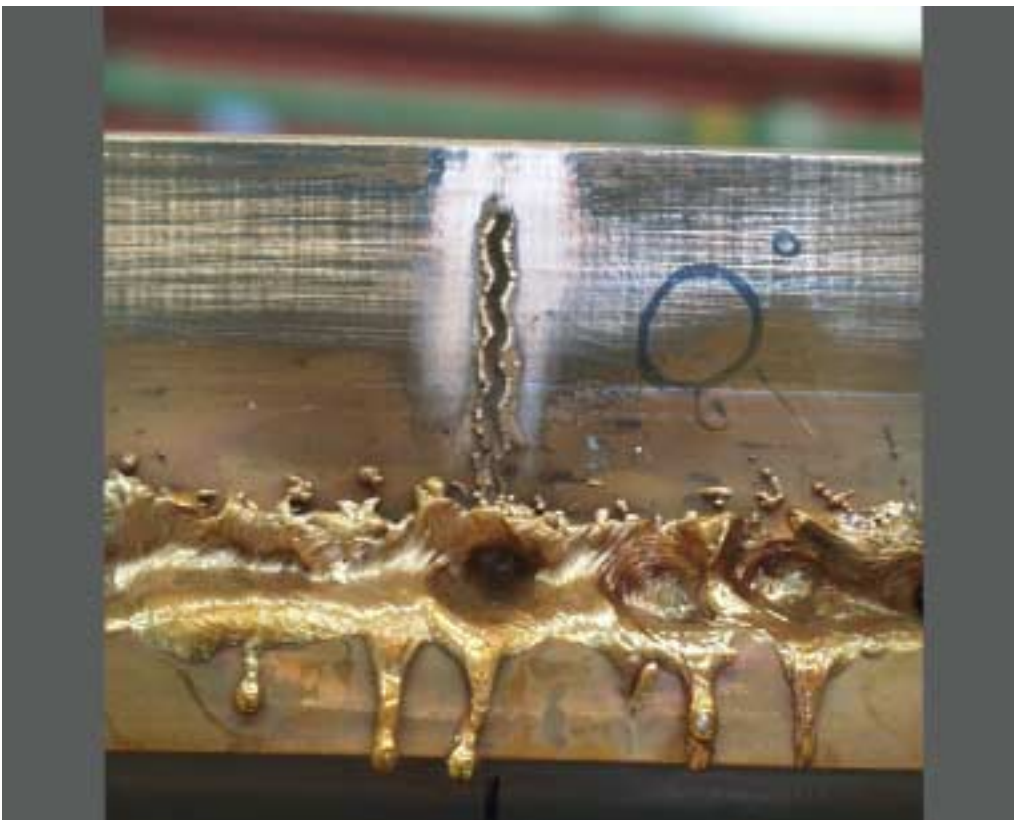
Lid weld no 20, view of the weld surface and the zero marking.
